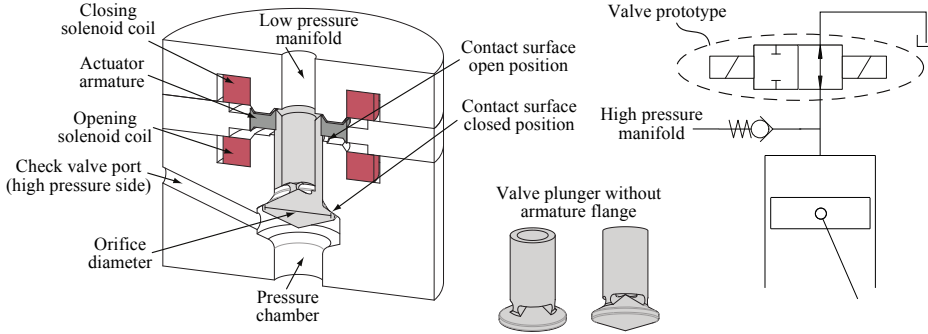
Prototype LP valve section view. A passive check valve is used as HP valve.
